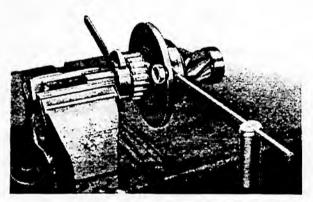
SETTING DRIVING PINION BEARING PRE-LOAD
